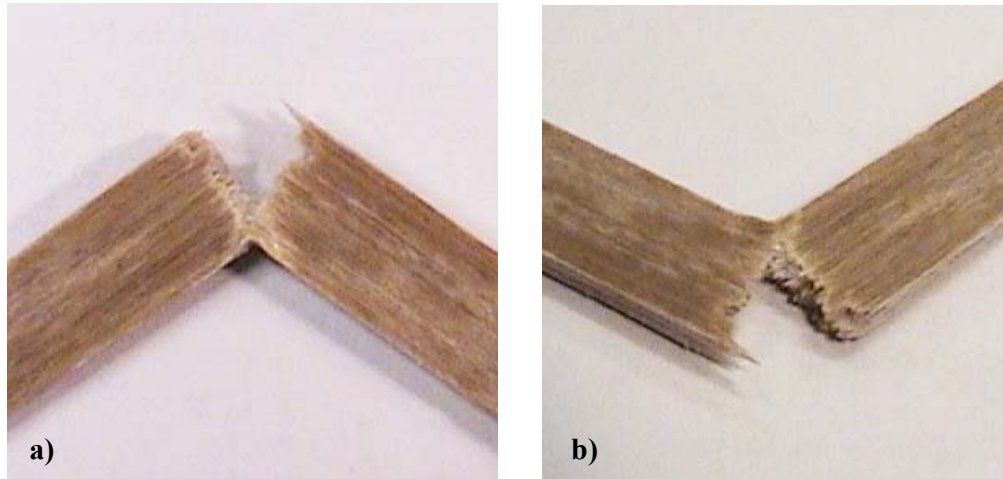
Single-ply composite specimens subjected to edgewise impact loading a) failure behavior and b) fracture surface
